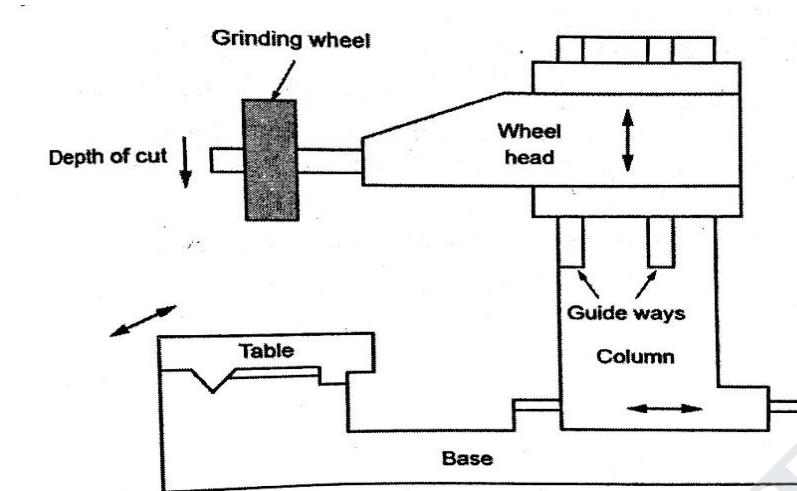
Horizontal spindle reciprocating table surface grinder
